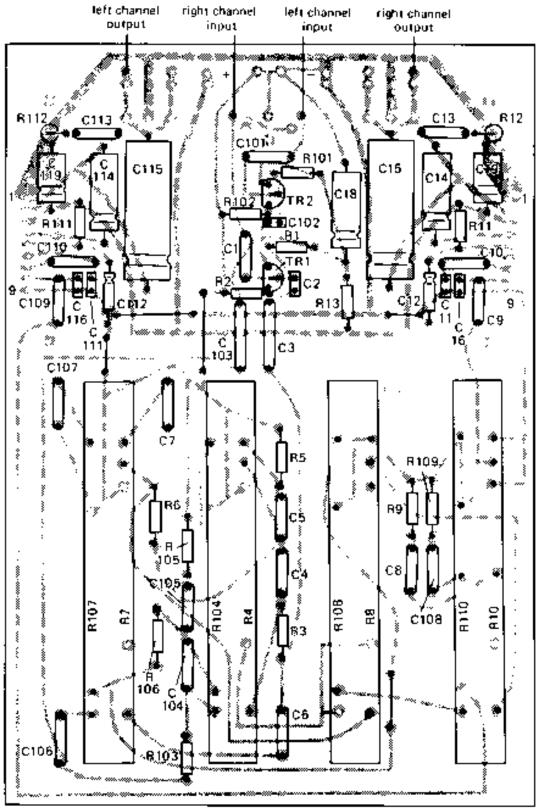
Component side of printed-circuit board showing component layout used for the circuit of Fig. 17 (Fig. 16 partity).
